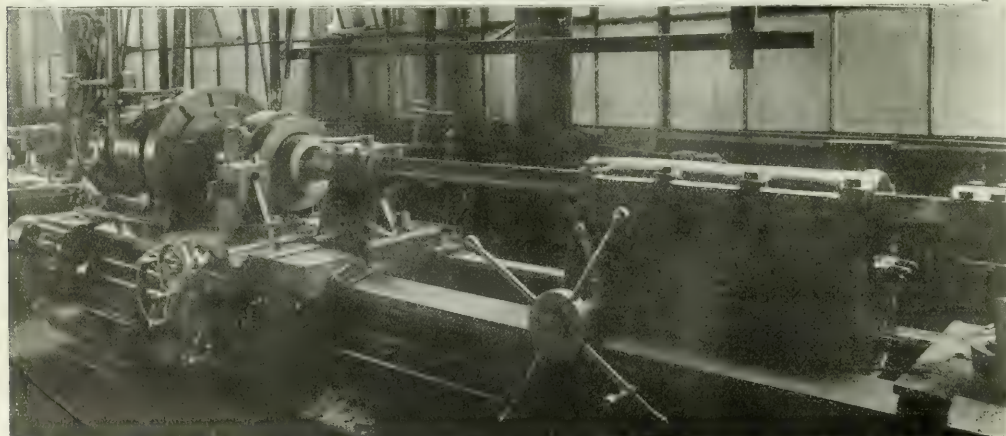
MACHINING THE INTERIOR OF SHELL IN LARGE ENGINE LATHE WITH BORING TAILSTOCK AND SPECIAL CUTTING-OFF TOOL REST.
